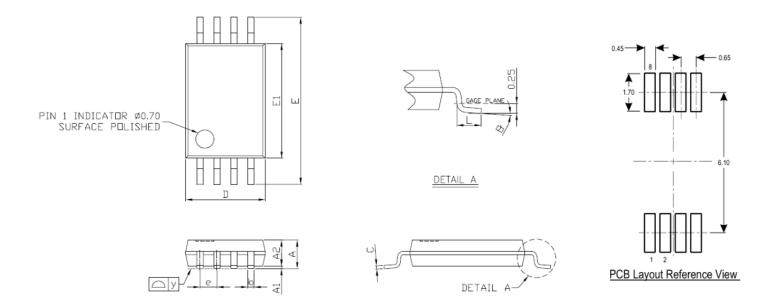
SOIC-8 Package Drawing and Dimensions
